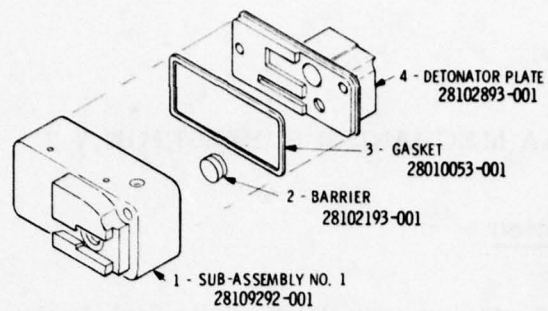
Machine No. 2 - S&A Mechanism Subassembly 2
